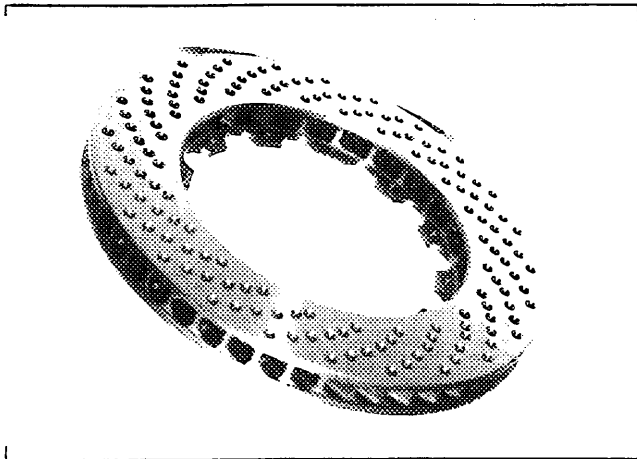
FRONT AND/OR REAR BRAKE DISC
